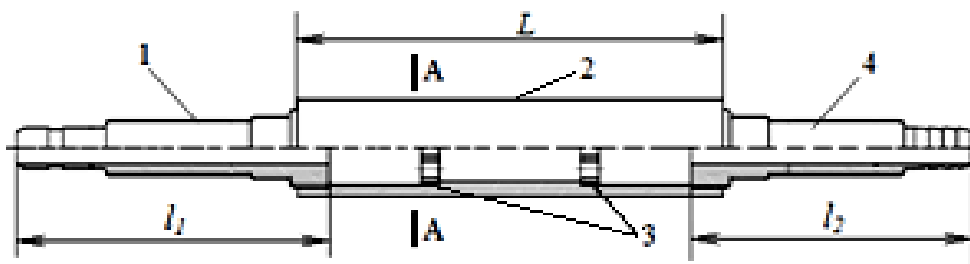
Heat transfer pipe and its parts: 1,4-lower and upper nozzles; 2- heat transfer pipe; 3-hole plates; dP-hole diameter; Dp-plate diameter; Fs-The surface of the perforated part of the plate.
